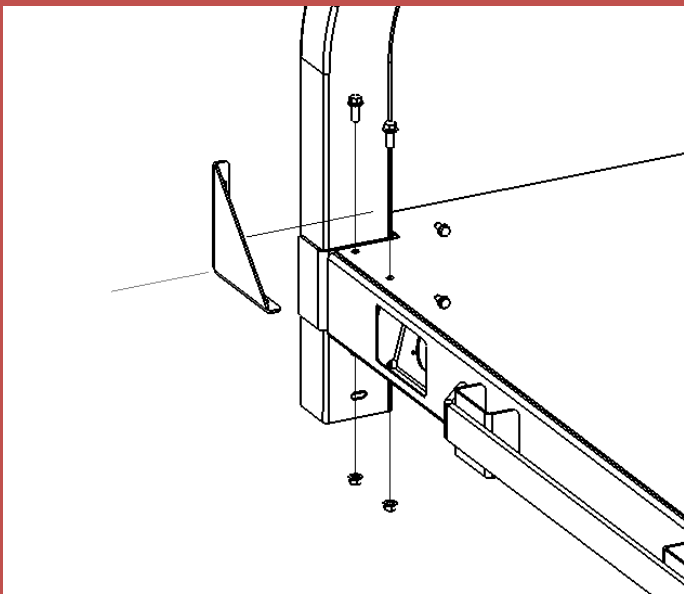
84W Bulkhead Gusset Installation Bolt Alignment
